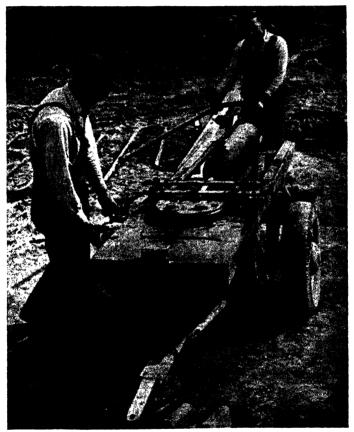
Power coil-bending machine. (A. M. Byers Company.)
